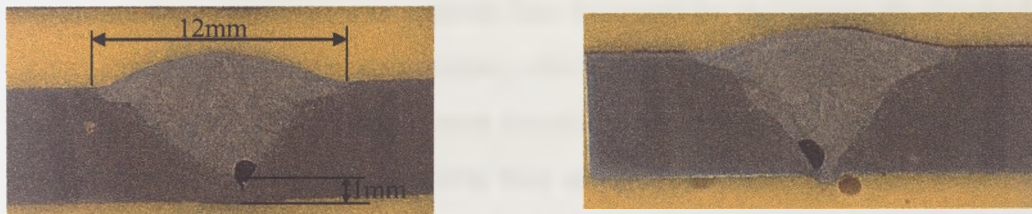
Macrographs of the weld for test specimen 1
